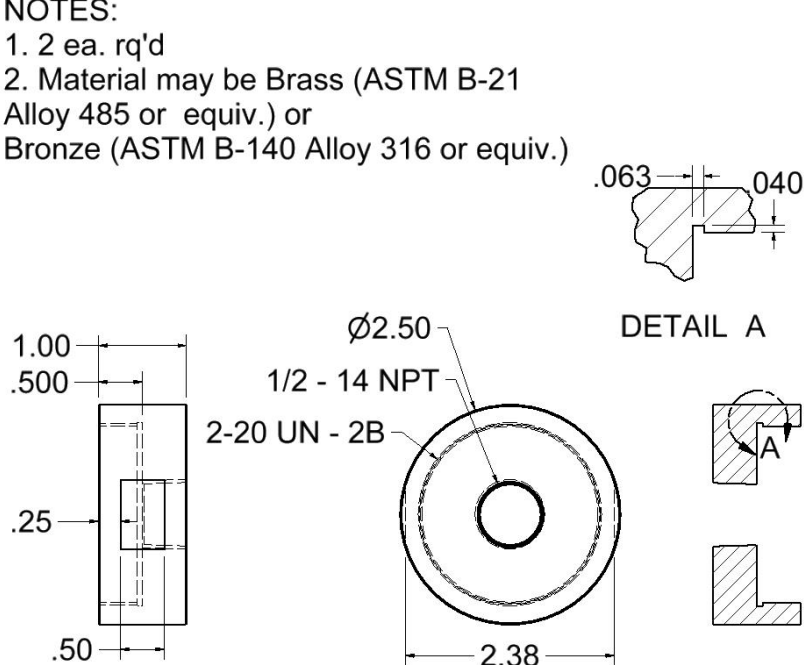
Mechanical drawing of replacement end cap; dimensions are given in inches
